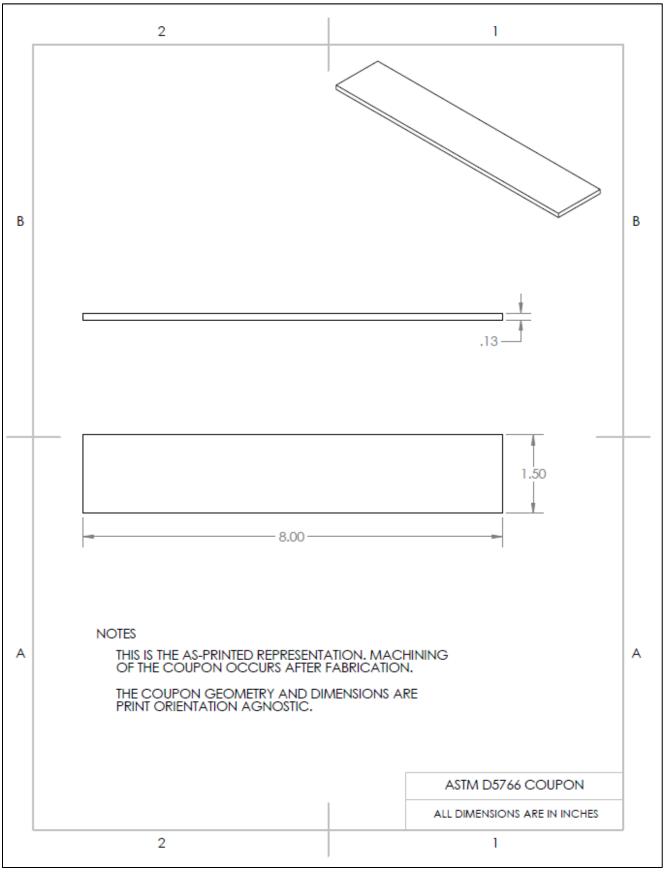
As-printed drawings used to develop the CAD model for open and filled hole tension specimens.
